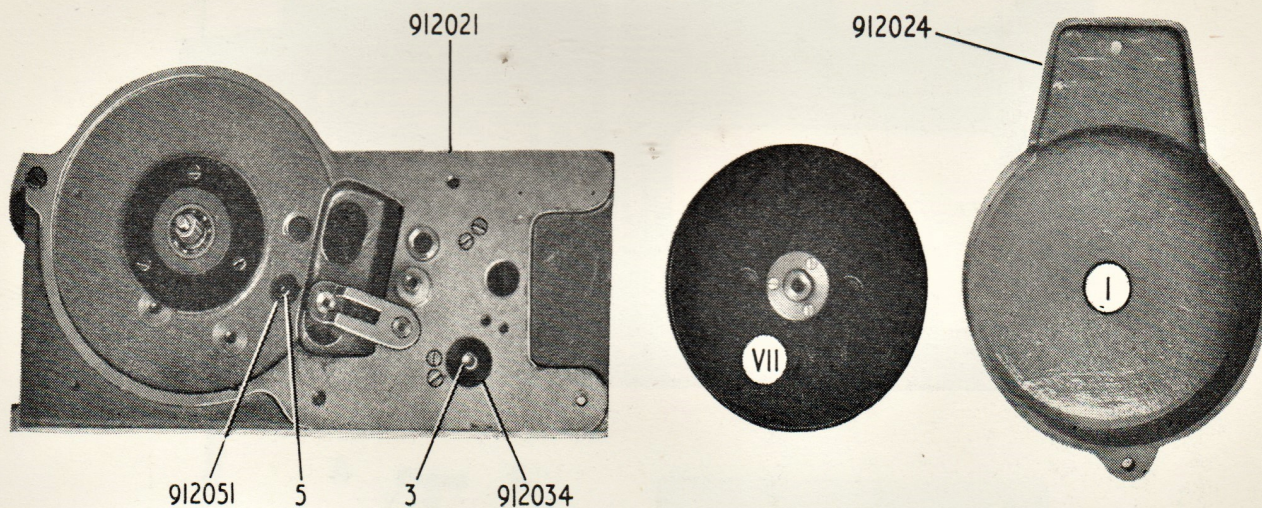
KEYPLATE AND FINAL ASSEMBLY 912 SOUNDHEAD
